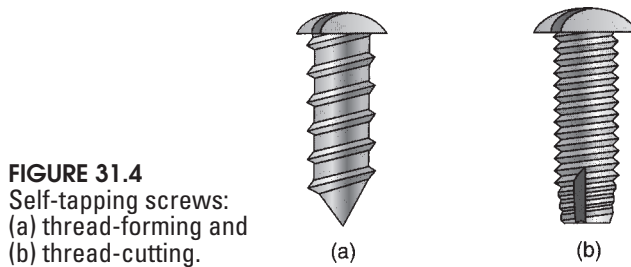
Self-tapping screws: (a) thread-forming and (b) thread-cutting.
